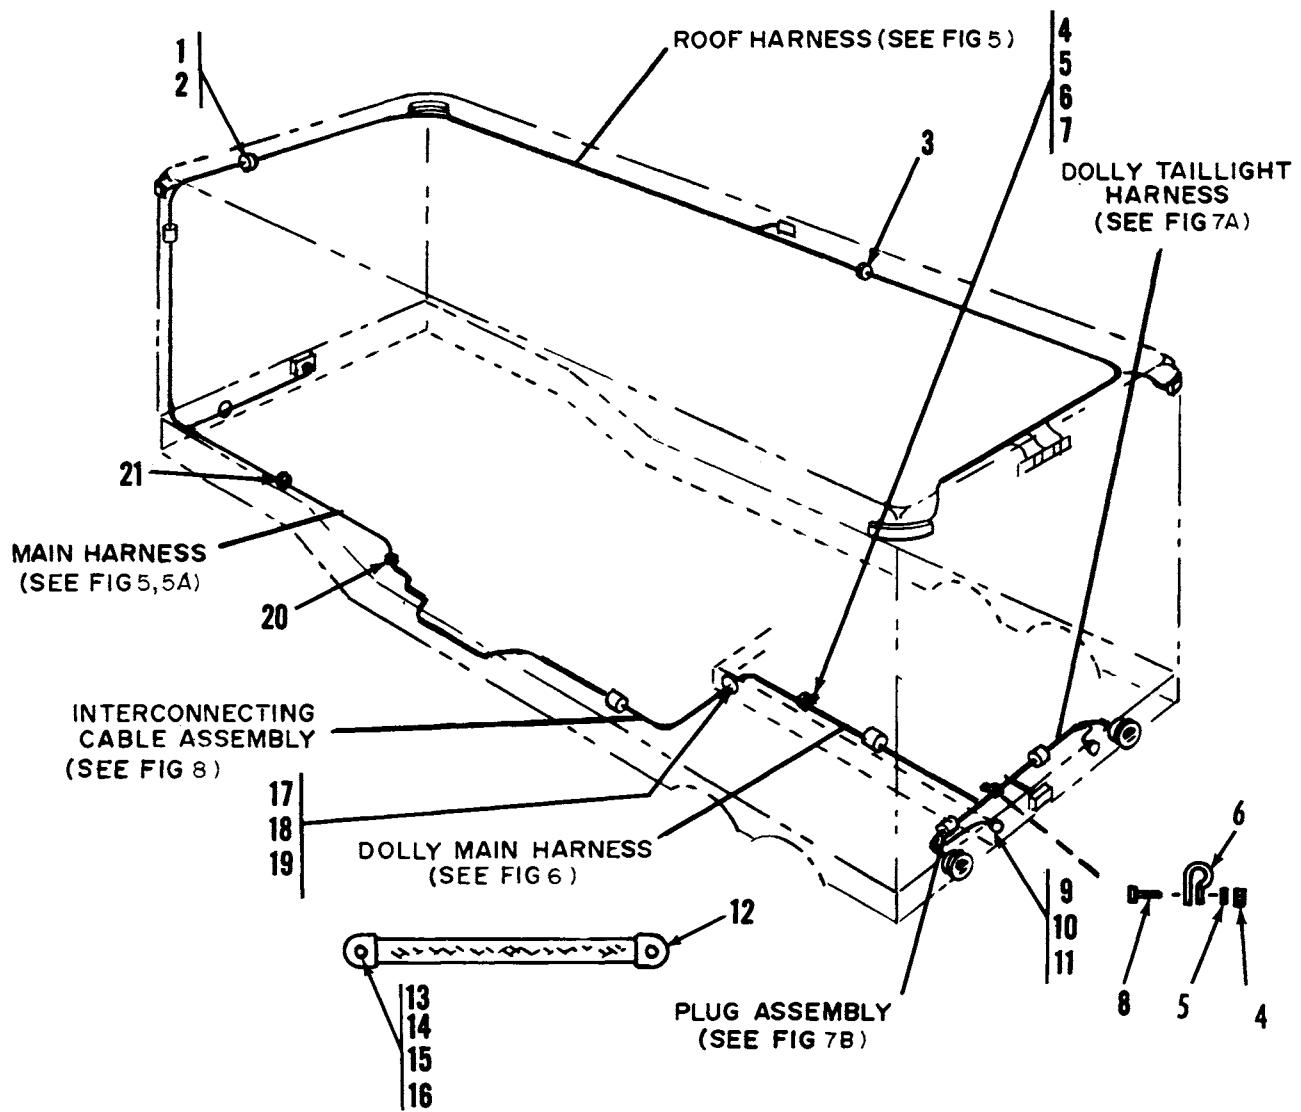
A. Wiring Harness Attaching Parts, XM991E1, XM995E1,
